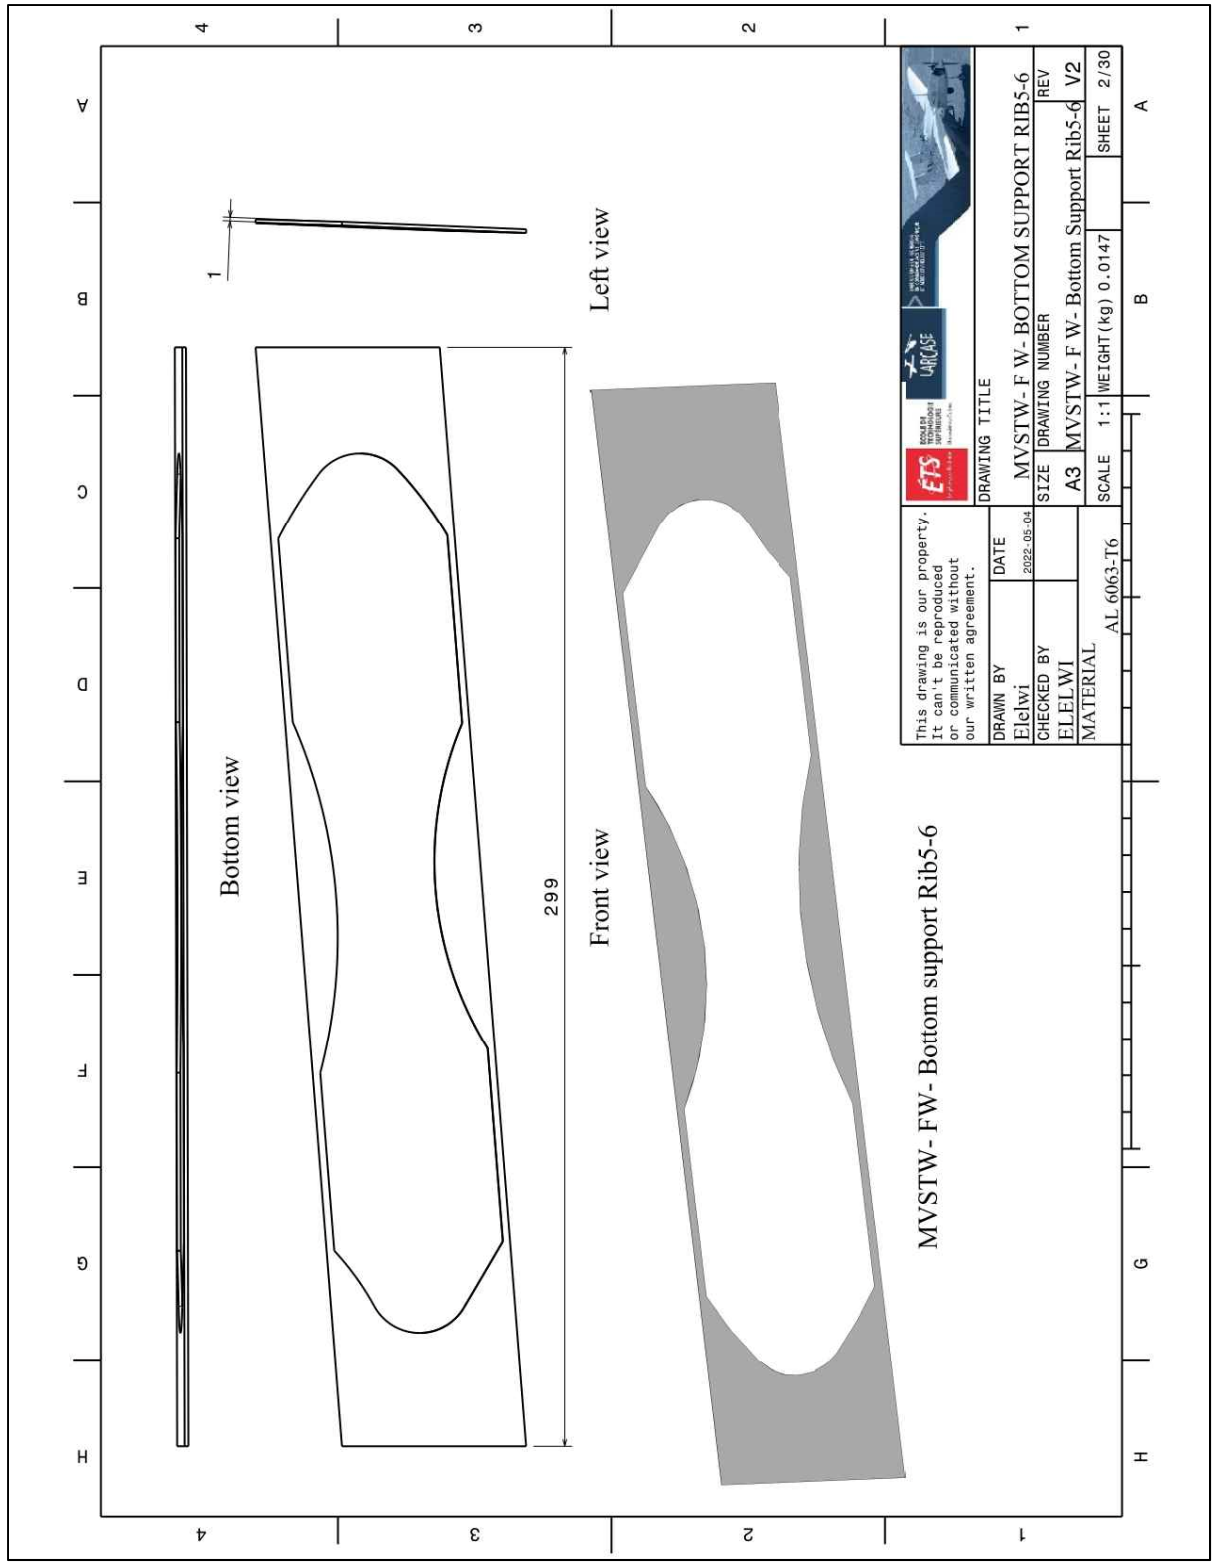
MVSTW Fixed Wing Bottom Support Rib 5-6 Using Al 6063-T6
